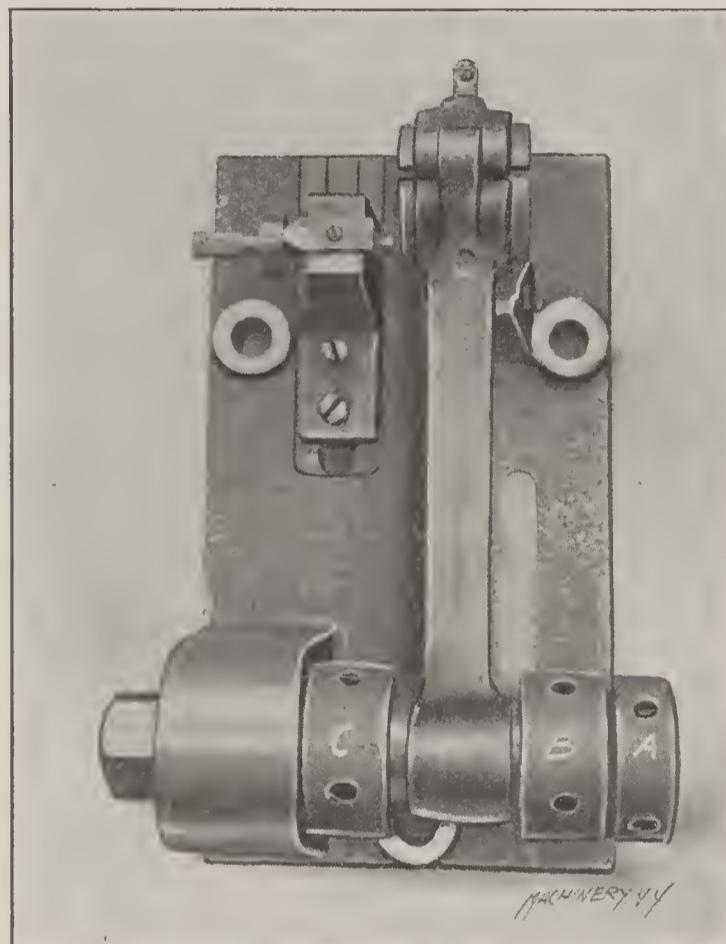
Fixture for Testing the Relative Lateral Positions of Connecting-rod Bearings
